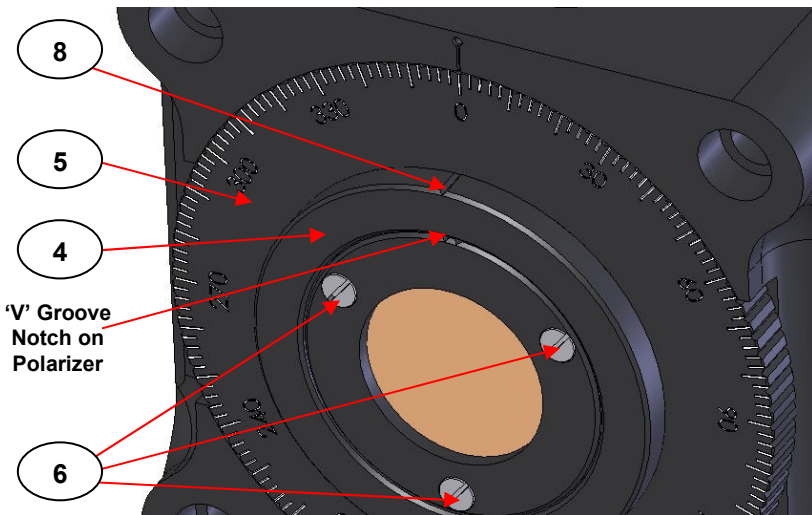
Detail for Alignment of GS57010 Polarizer into Graduated Rotator Wheel at 0° Angle
